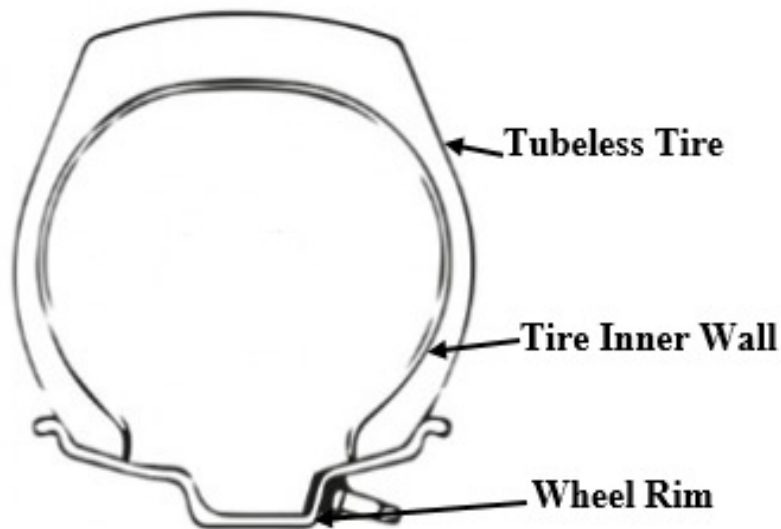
Illustrates the Tubeless Tire Arrangement of the Wheel Used on a Vehicle where Air is filled inside the Tire without Any Tube.
